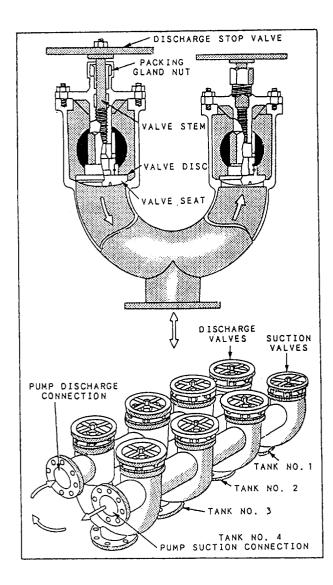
Valve manifold showing cutaway view of the valves and typical combination of suction and discharge valves.
